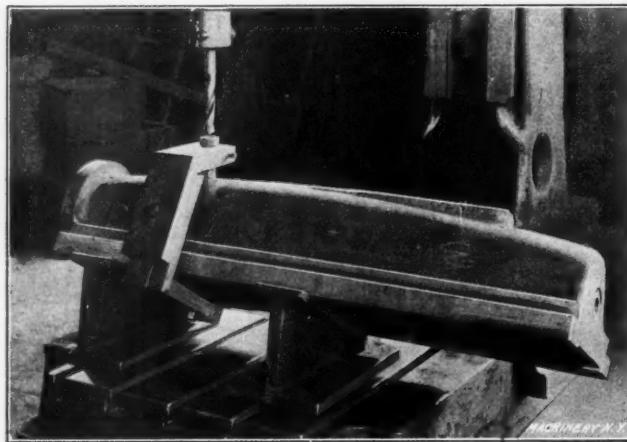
Drilling the Holes for the Ram-adjusting Shaft in a Fosdick Radial Drill Press
